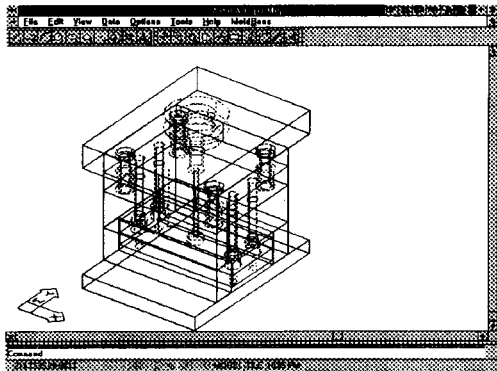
The normal view of mold parts and mold-base(SA-Series).
